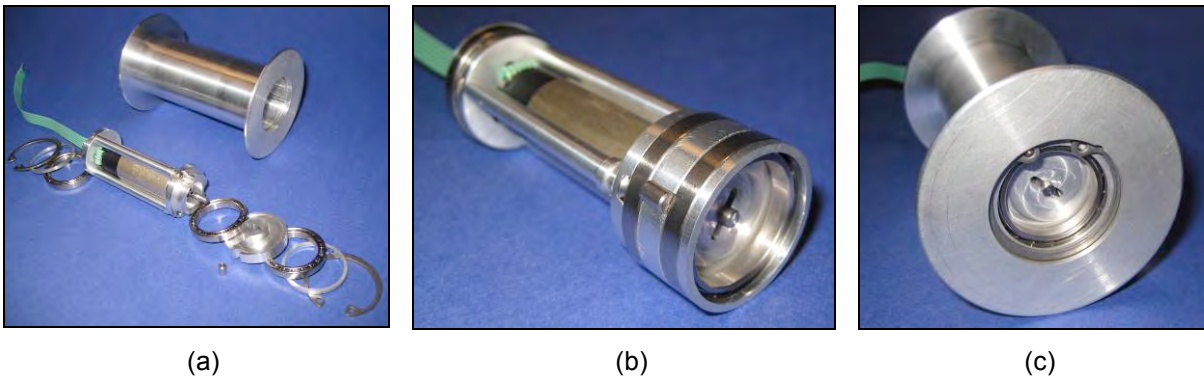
Bobbin hardware components – (a) separated, (b) assembled, (c) installed.
